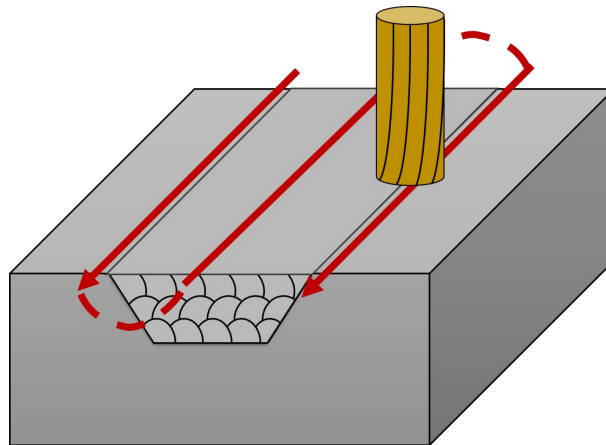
Tool path of the milling cutter for the finishing machining.
